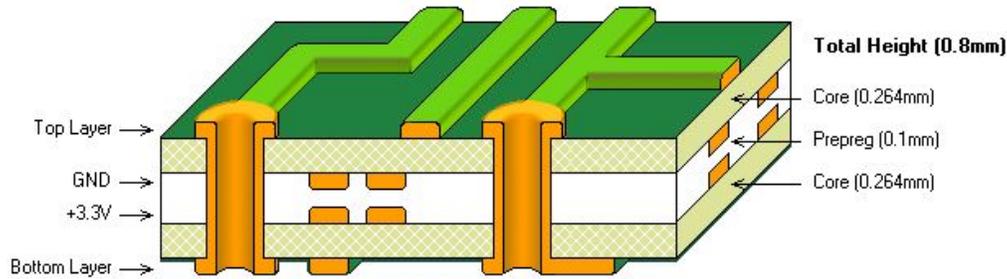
Standard PCB stack-up. Image depicts a four layer PCB. From [Stack Exchange-15].
